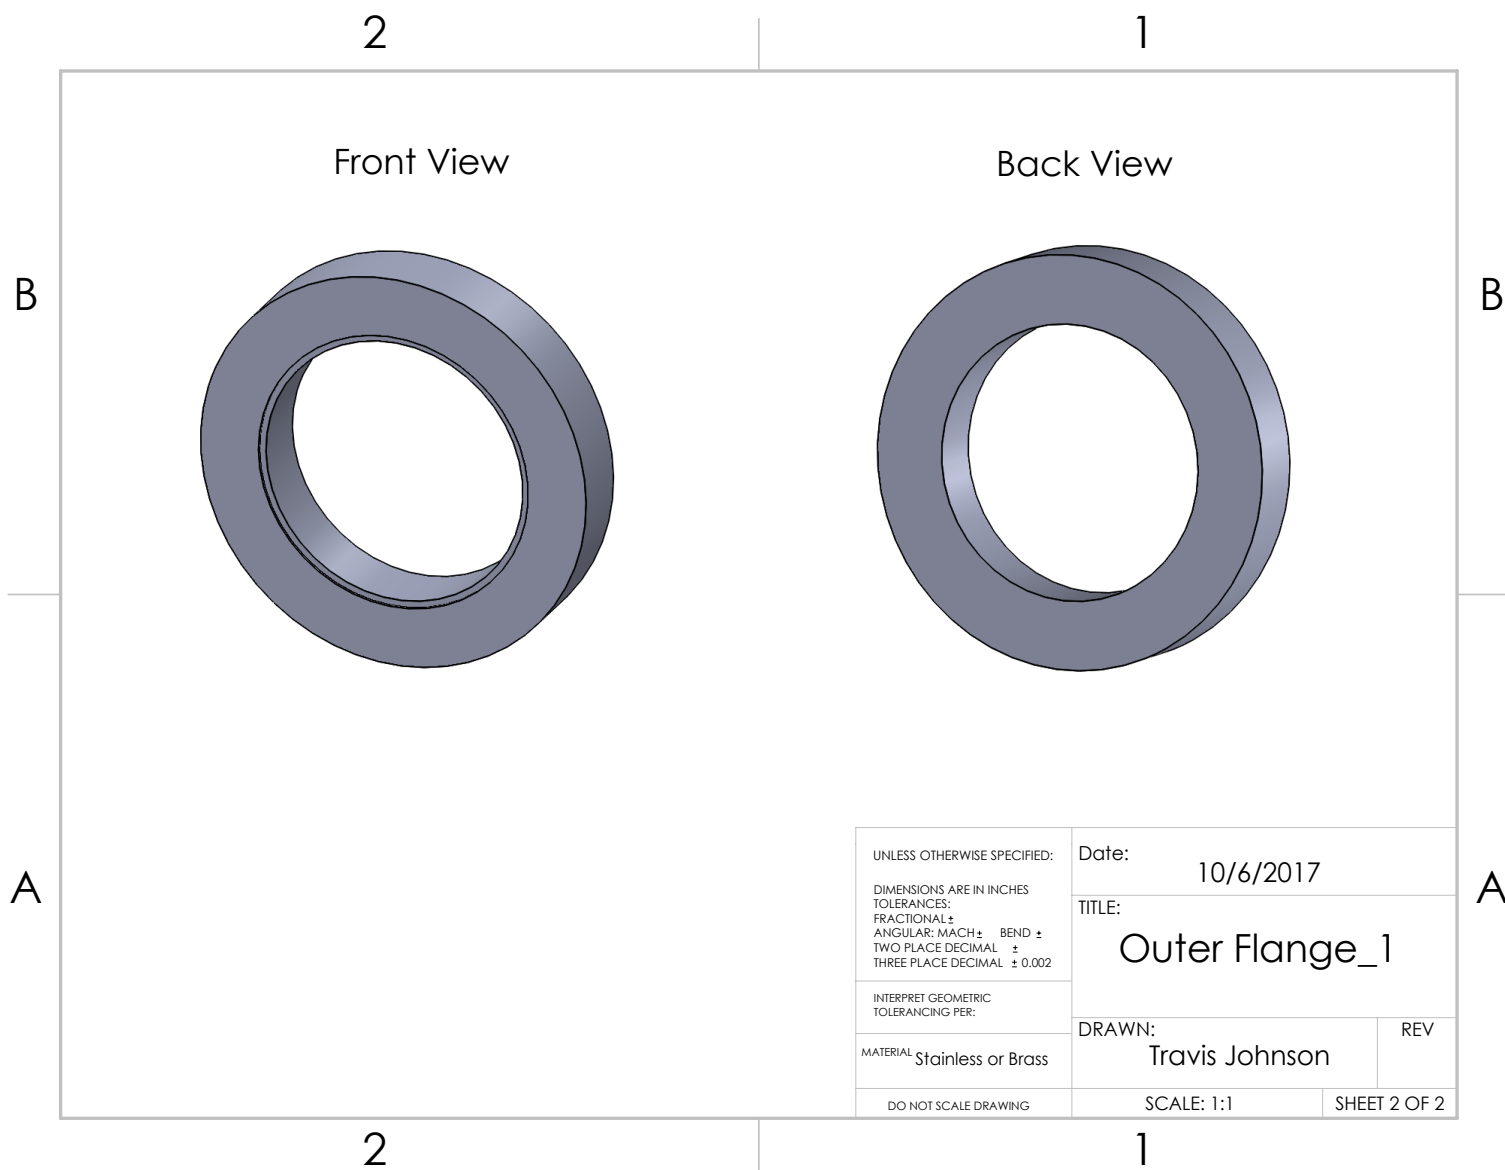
Page 2 detailing the first piece of the three piece flange. Image taken from SolidWorks®.
